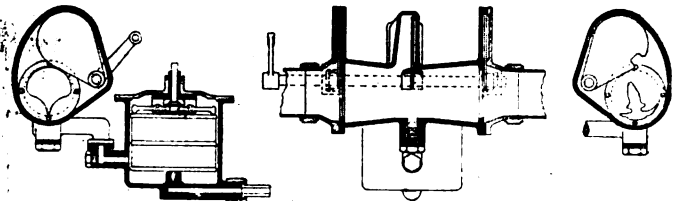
Transverse and Longitudinal Sections of Brooke Carburettor.]
